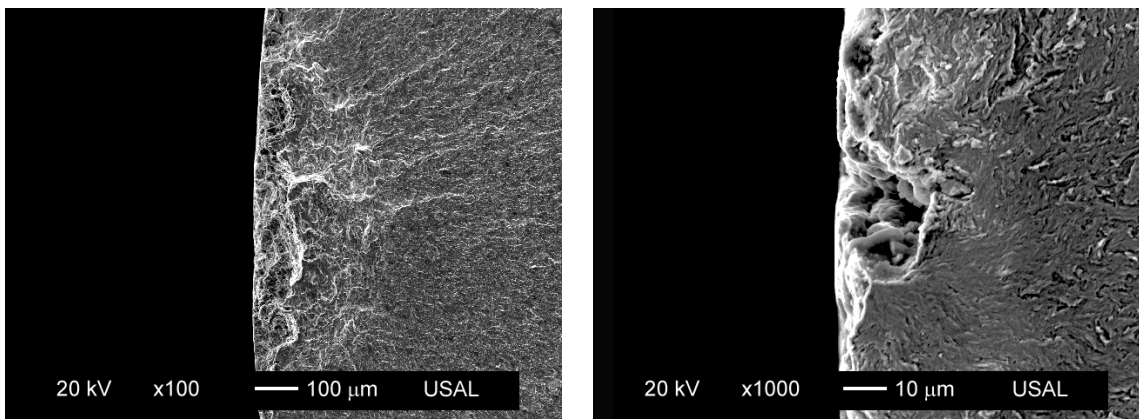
Initiation of fatigue crack growth from a surface defect: hot rolled bar (left) and prestressing steel wire (right). Both images represent the transverse fatigue fracture surface (circular section perpendicular to the wire axis or cold drawing direction) and crack growth direction takes place from left to right in the fractographs
